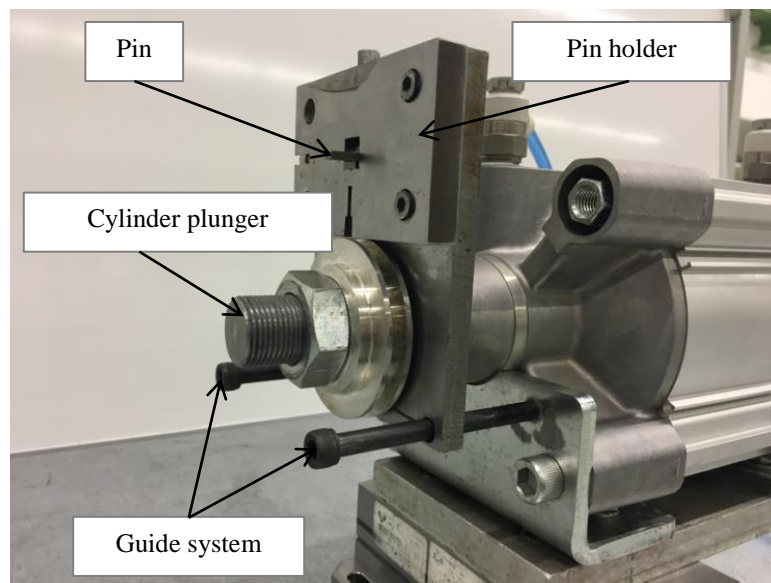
Pin holder and guide system of pneumatic cylinder to avoid pin rotation during tests
